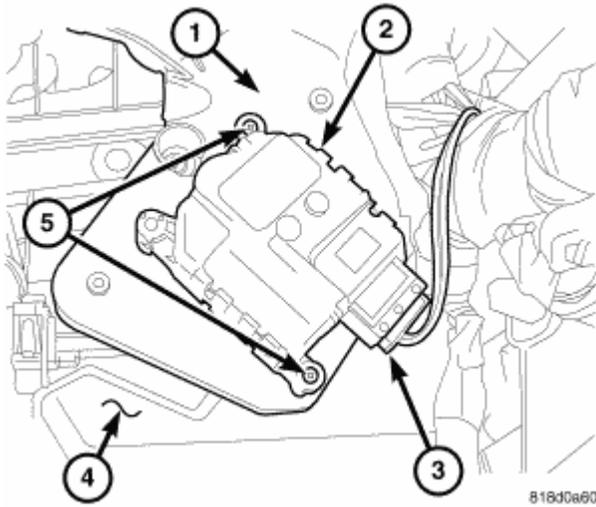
Identifying Actuator Mounting Bracket, Blend Door Actuator, Wire Harness Connector, Air Distribution Housing & Screws
